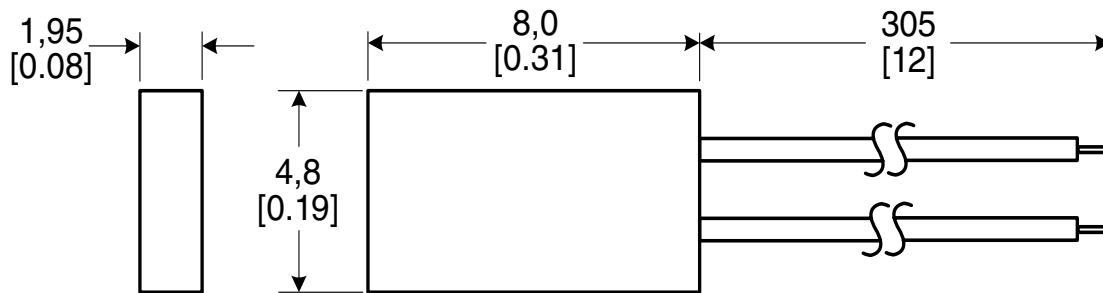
Mounting Dimensions (For reference only. mm/[in].)
